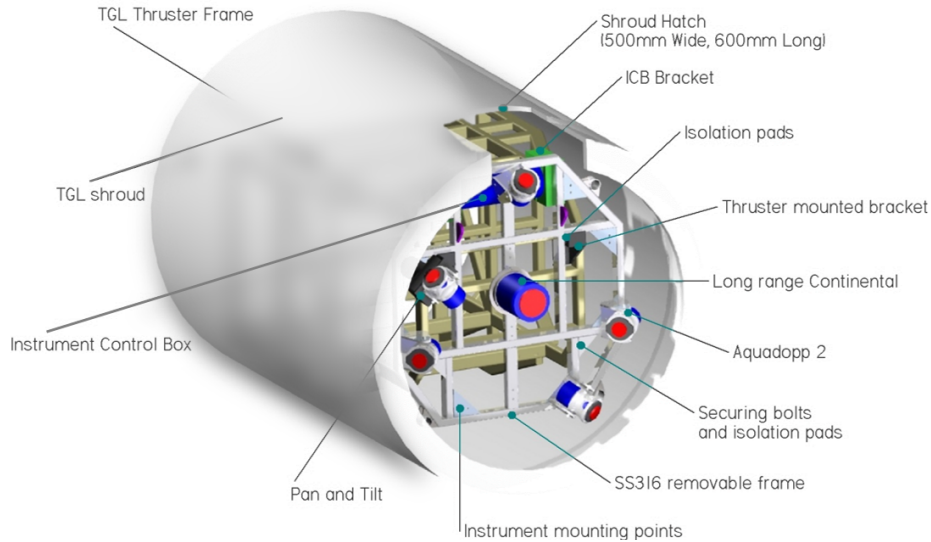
ESIP-2 (rear frame) positioning, outline instrumentation positioning and attachment method on 1MW turbine rear thruster unit.
